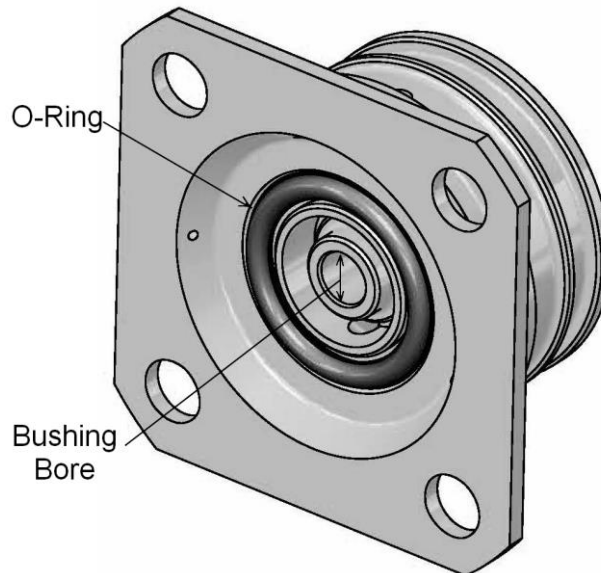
, Guide Assy Showing the O-ring and Bushing Bore
